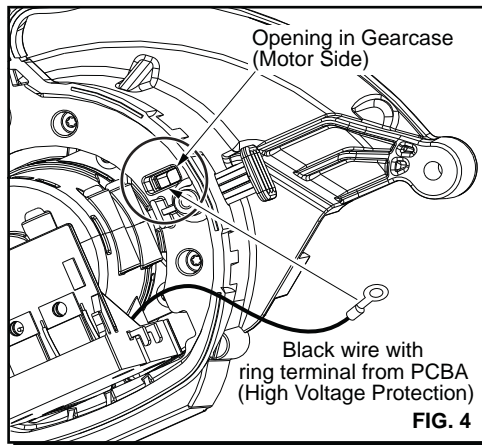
Route the black High Voltage Protection wire with ring terminal through opening in gearcase. Place black wire in trap on motor side and pull taut from blade side.
